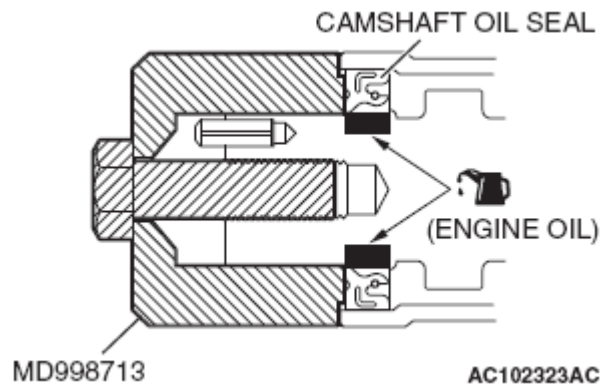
Camshaft Oil Seal Engine Oil Applying Area
